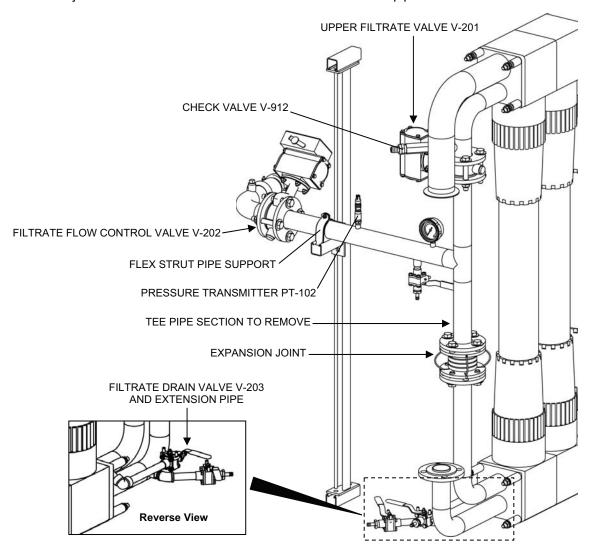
MF Filtrate Valve and Pipe Section Removal.
